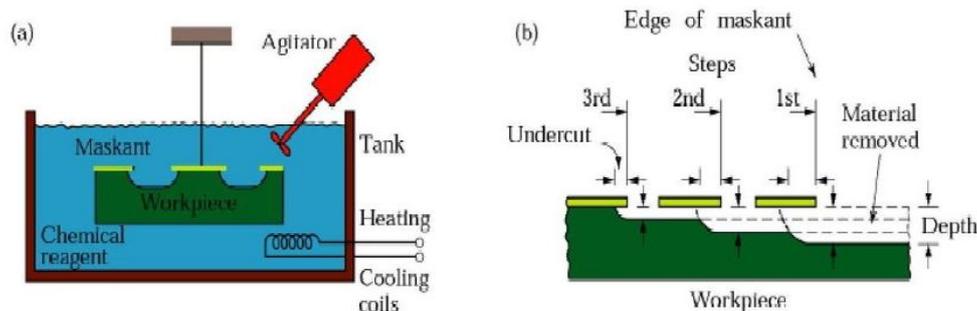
(a): Brief illustration of the chemical machining process, Figure 1(b): Stages of producing a profiled cavity by the help of machine called agitator
